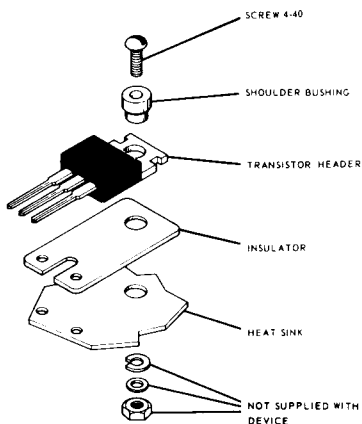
Use of spacer (shoulder bushing) to avoid damage to plastic package in mounting.
